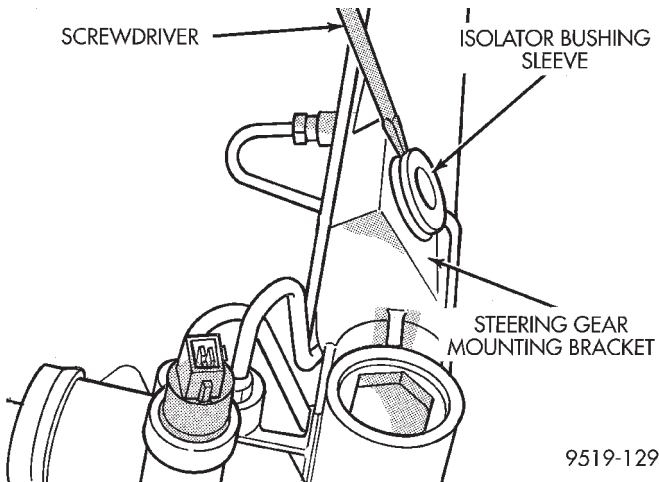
Mounting Bolt Isolator Sleeve Removal
